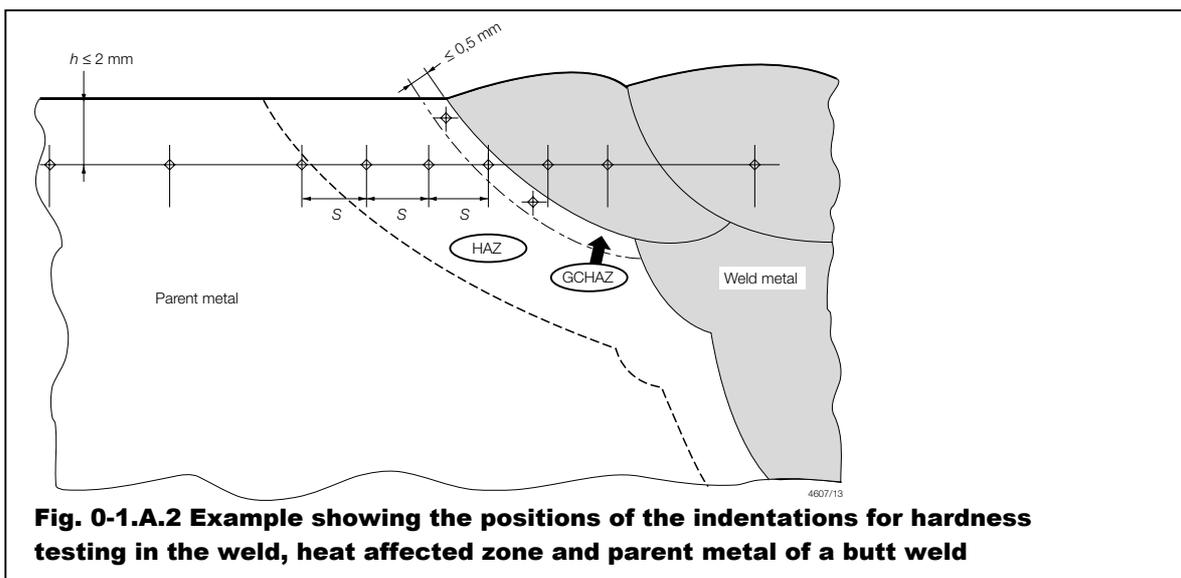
A.2 Example showing the positions of the indentations for hardness testing in the weld, heat affected zone and parent metal of a butt weld
